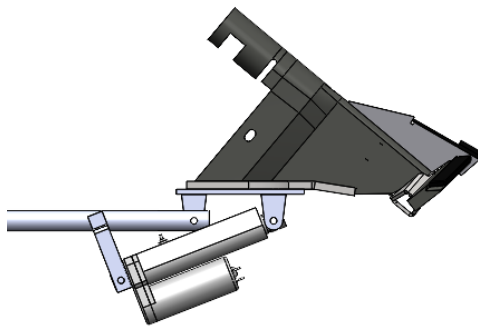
CAD model of the linear actuator shaft end tilt concept.
